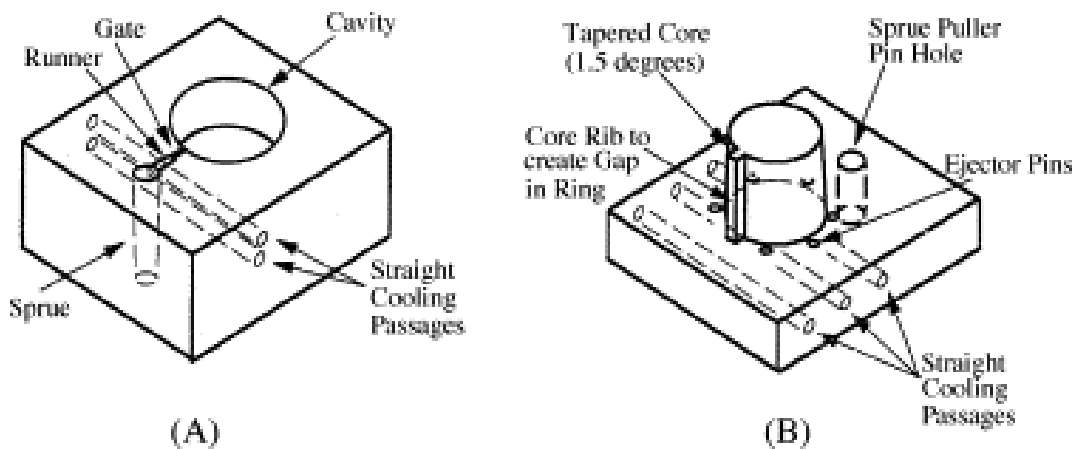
Conventional cooling channels in (A) Cavity and (B) Core of a Mould [9]
